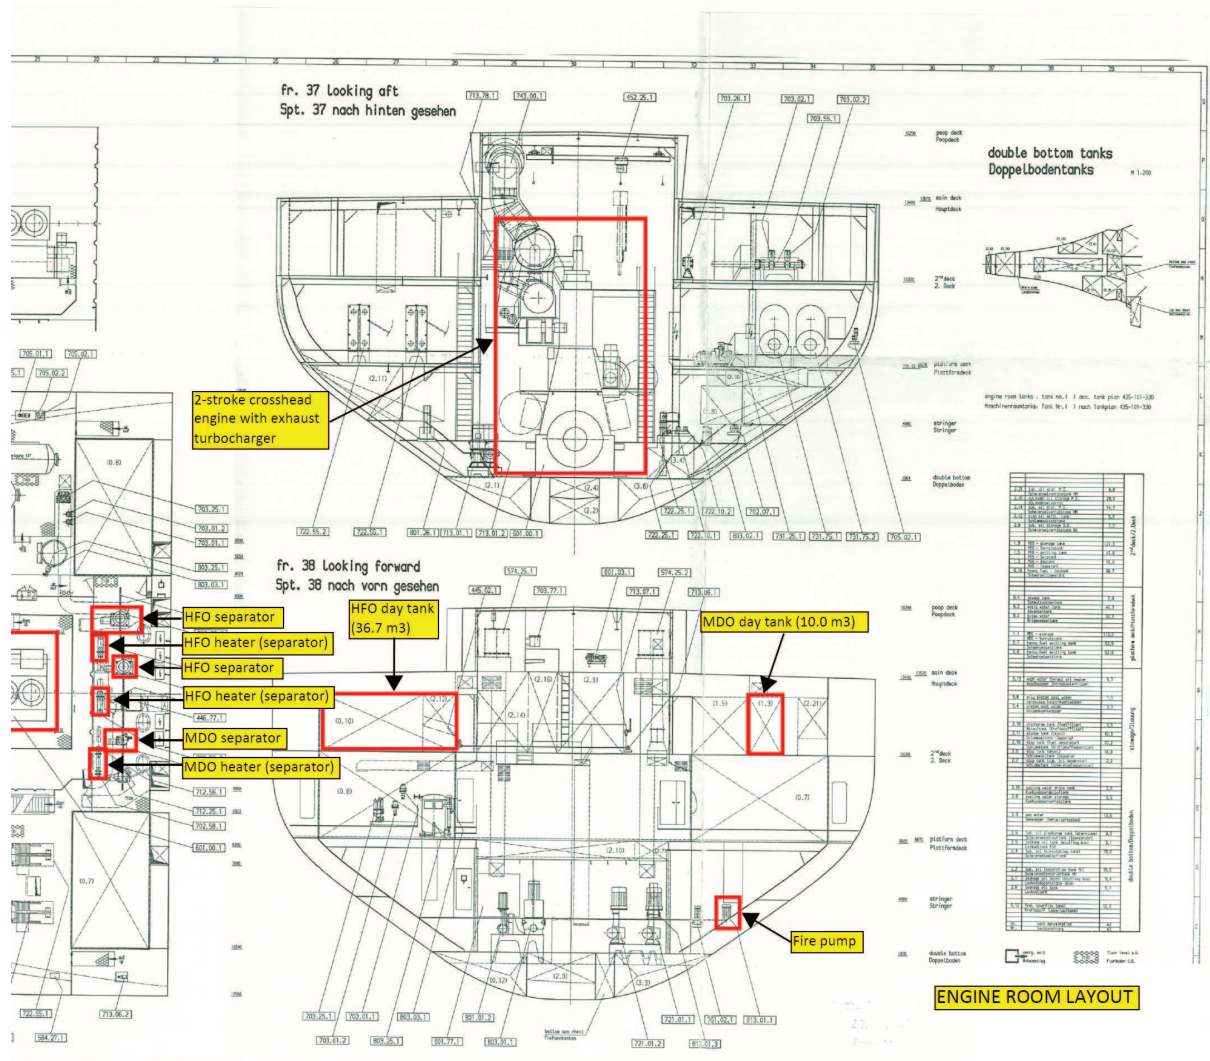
Machinery space layout of M/S Thesis with a two stroke engine as seen from a top view, looking aft and forward, slightly modified to highlight the most relevant parts (Kvaerner 1995).
